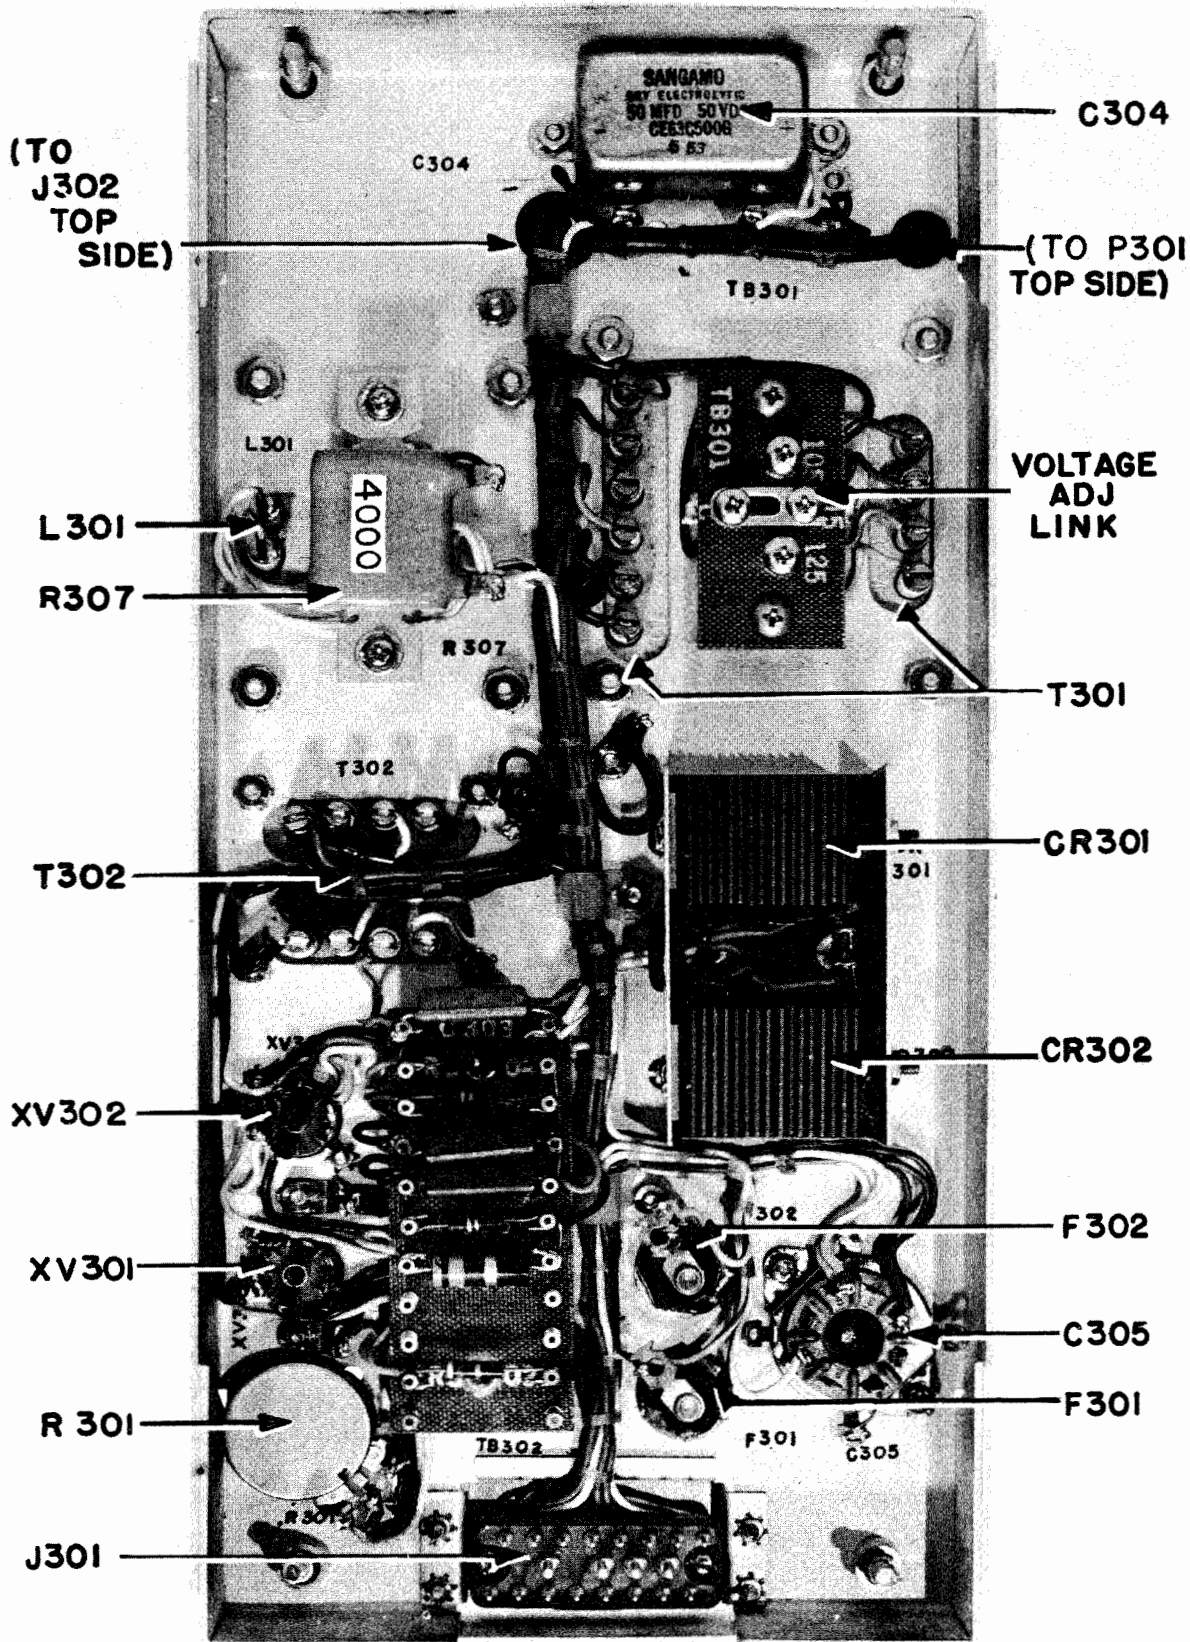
Audio/Power Chassis Assembly, Bottom View
